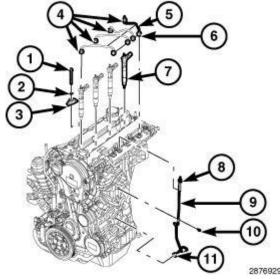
Fuel Rail & Fuel Injector Components Courtesy of CHRYSLER LLC
